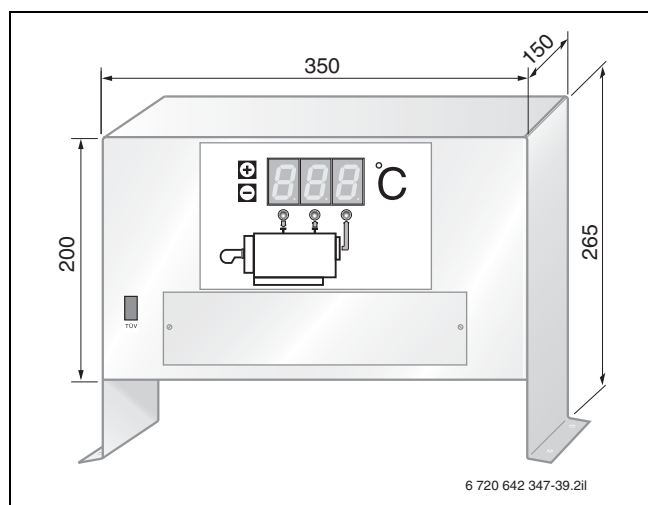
UNIMATIC display units and control units for UT-L boilers (dimensions in mm)
